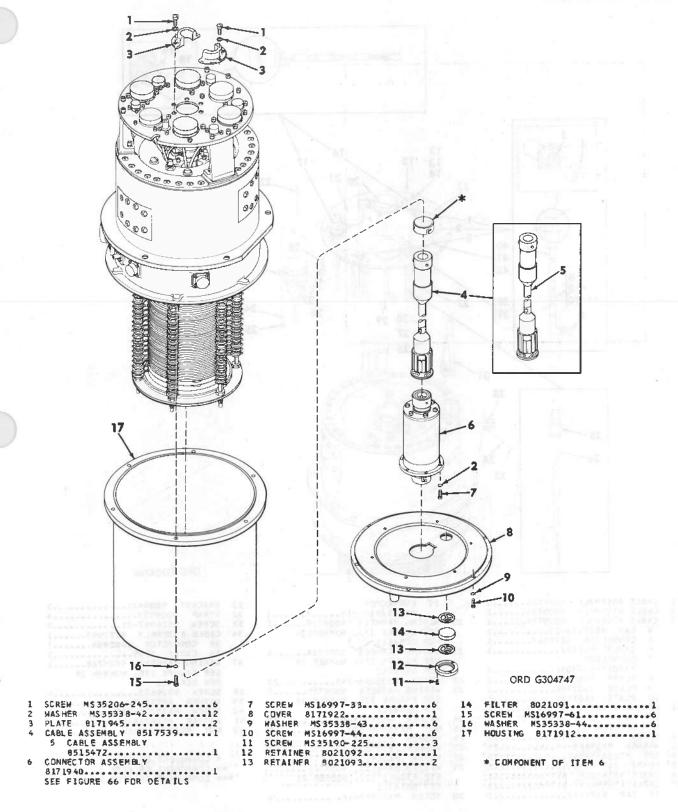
RING ASSEMBLY, ELECTRICAL CONTACT /9009416/-PARTIAL EXPLODED VIEW /SEE FIGURE 5 FOR NEXT HIGHER ASSEMBLY/
